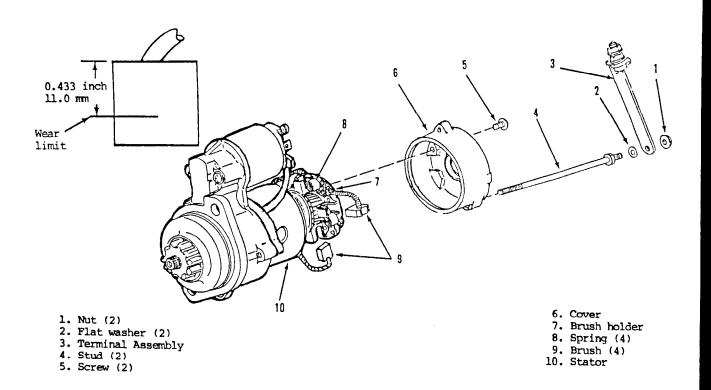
A. Inspecting Starter Brushes, Style II Starter
